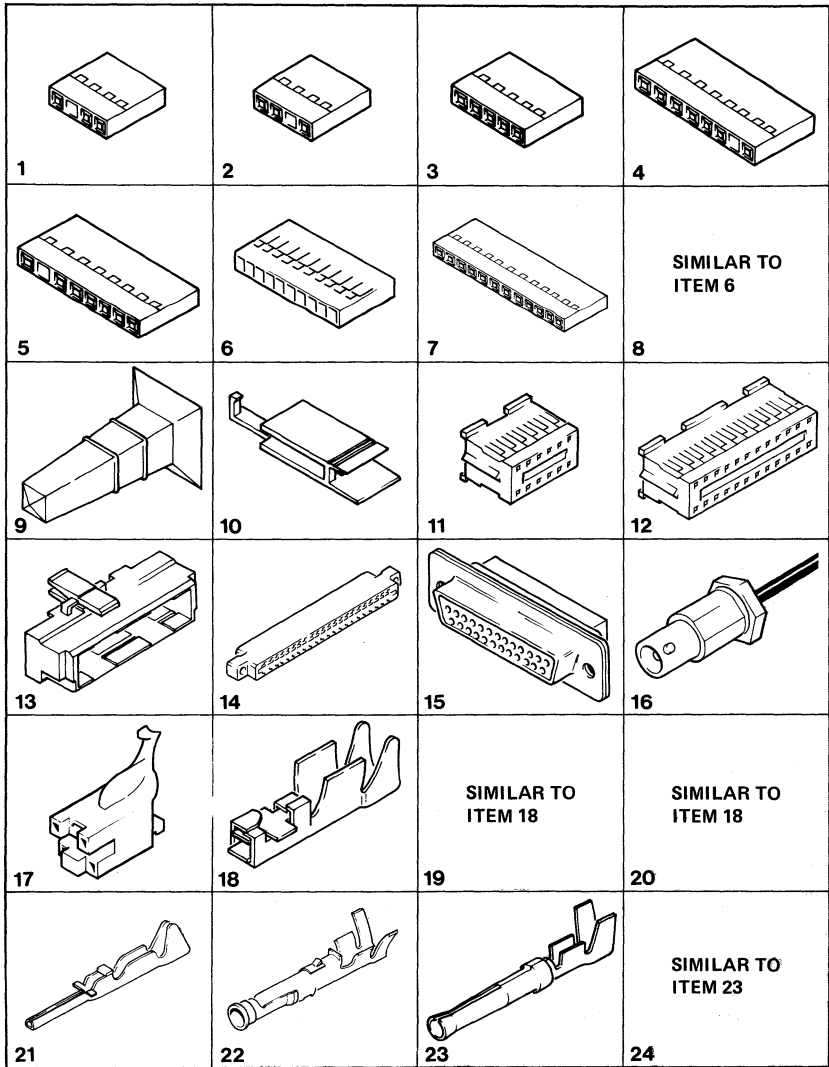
(Sheet 1 of 2). Jumper and Cable Component Assembly
